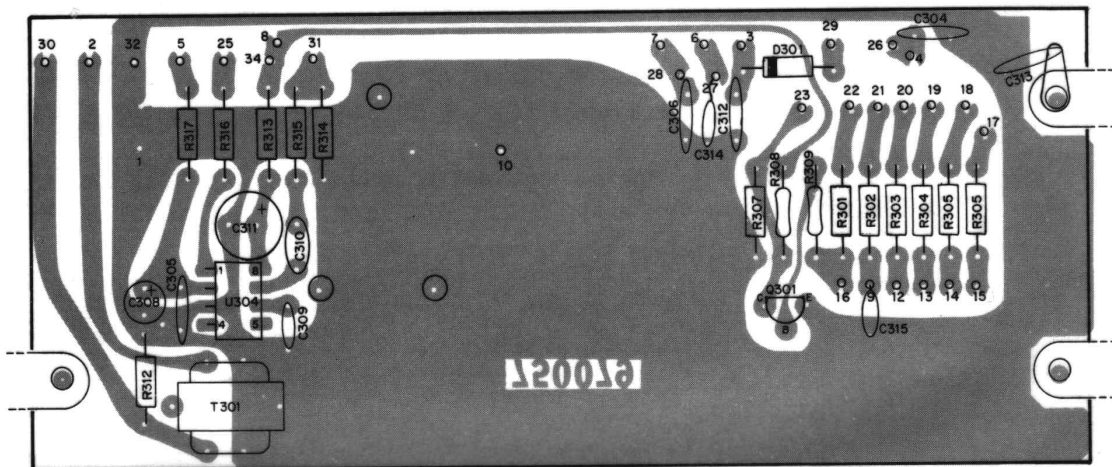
Component Outline, Main P.C. Board, Model 2710
